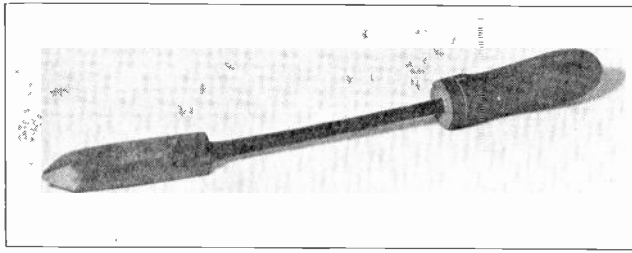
An ordinary soldering copper of the type commonly used in electrical work.
